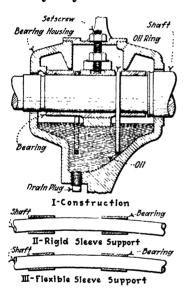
Diagram showing the construction of a motor bearing which permits a certain freedom of swing. In this type of bearing the sleeve and shaft are kept in alignment under varying load conditions, and in spite of shaft deflection. The effect of rigid support and flexible support of motor bearings are shown, exaggerated, in II and III.
